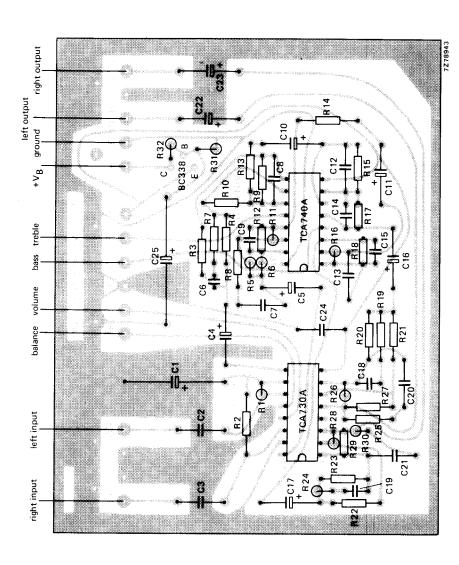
Printed-circuit board component side, showing component layout; for circuit diagram see Fig. 7.
